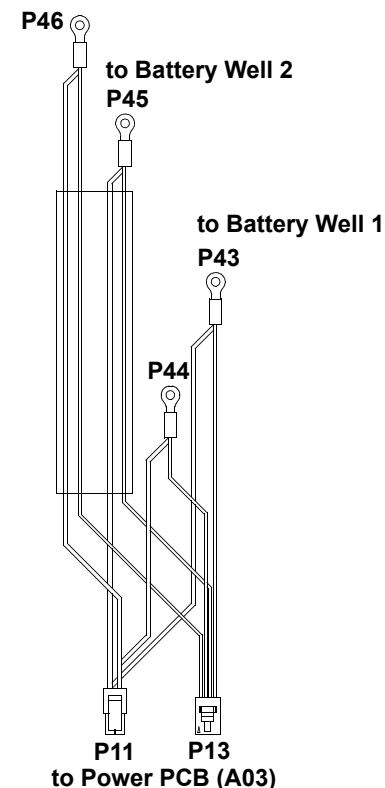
(V1) Power PCB cable connections. V2 cable, only P11 is used.
